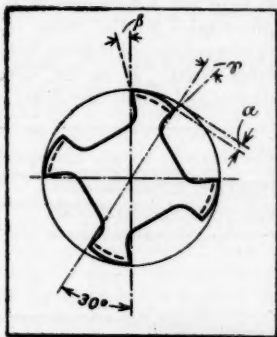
Sectional view of tap, showing front and back rake angles and relief.
